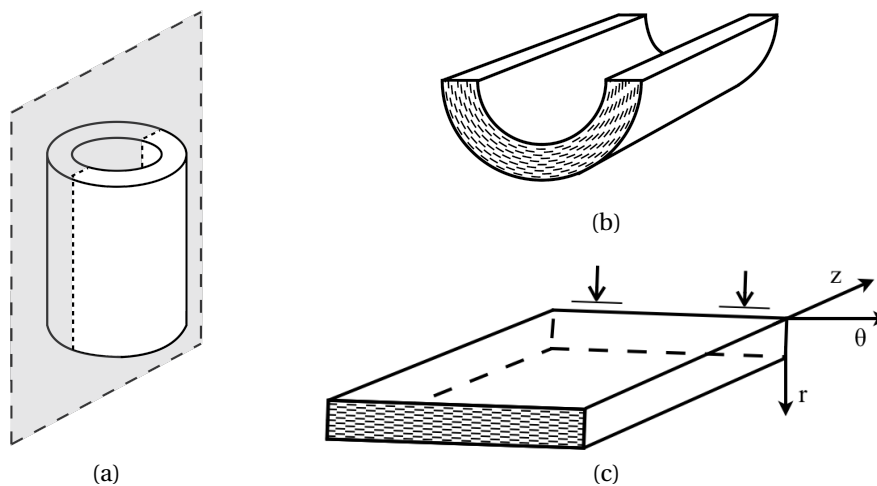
Sample preparation of torsion sample. (a) Removal of core. (b) Cut into a half cylinder (c) Flattening of sample with use of a hydraulic press.
